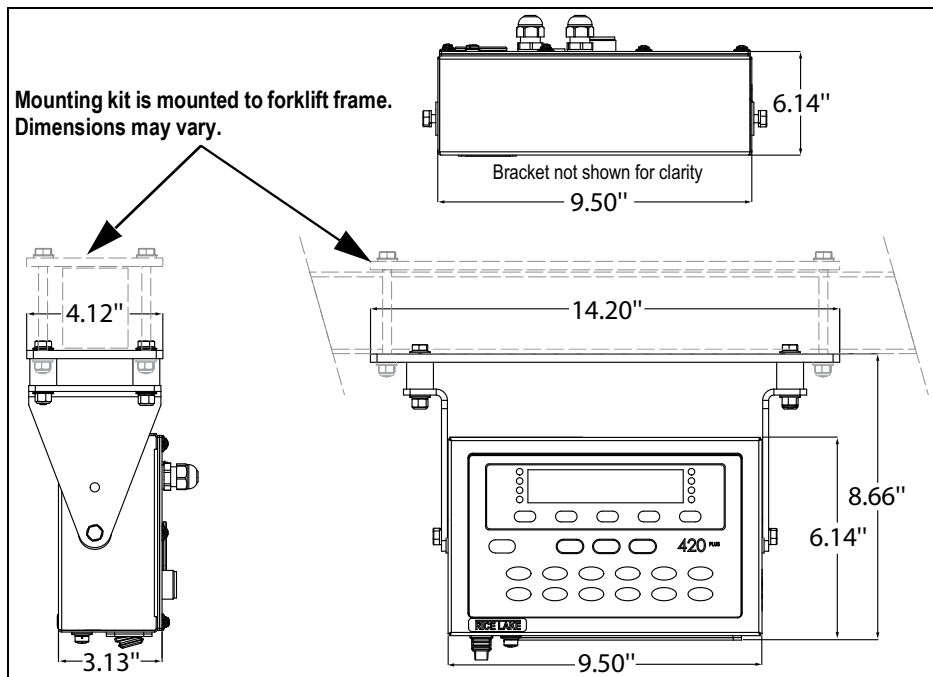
CLS-420 Indicator Dimensions with Universal Mounting Kit
